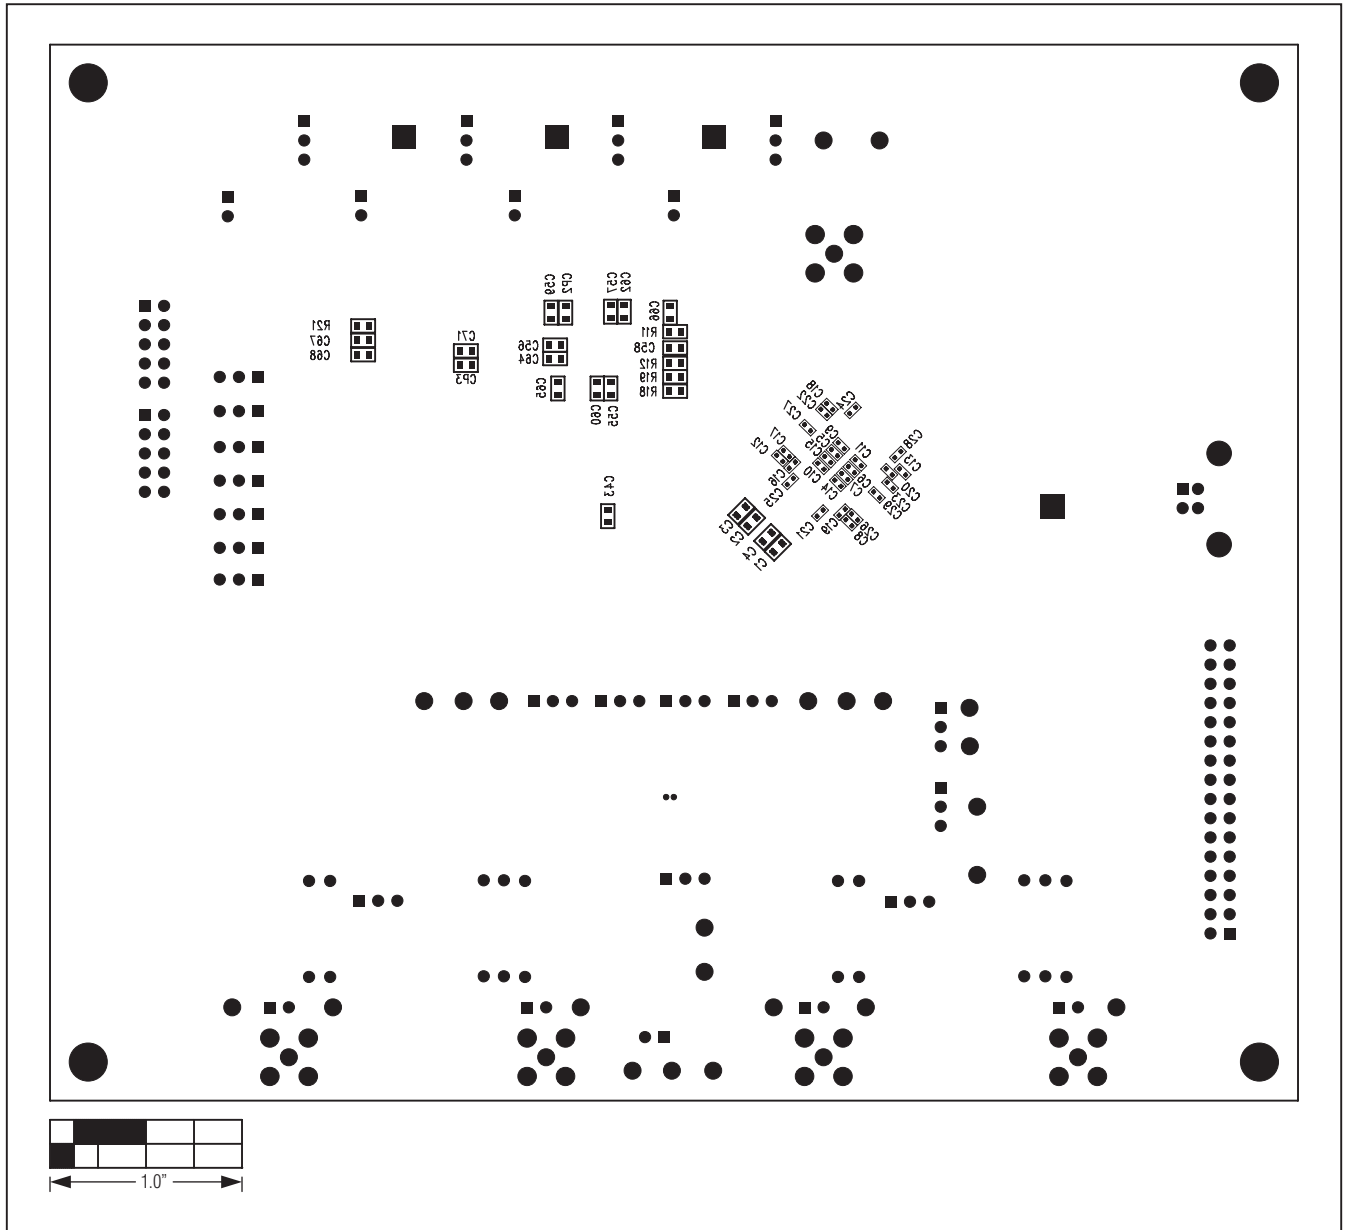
MAX11666 EV Kit Component Placement Guide—Bottom
